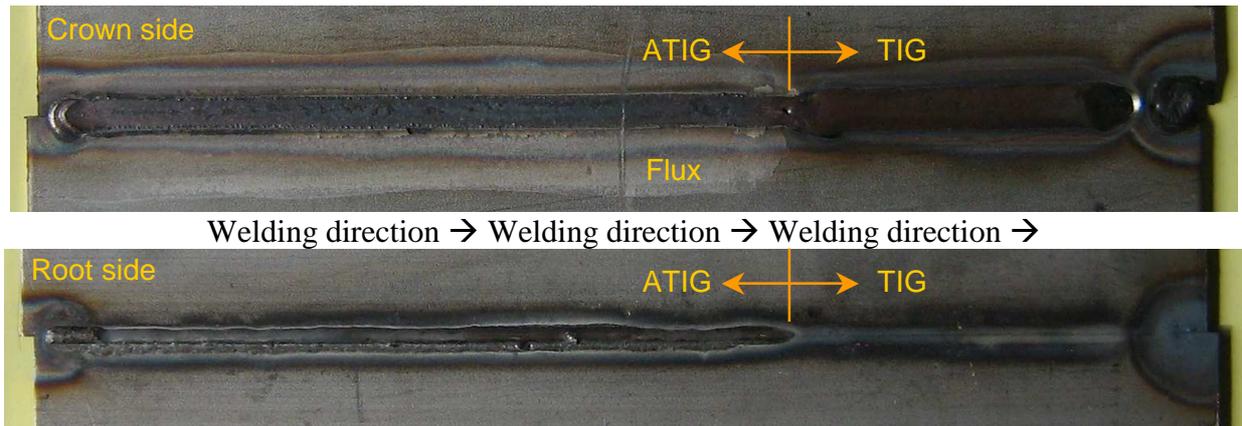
Crown side and back side of the welded joint of the Sample 21.
